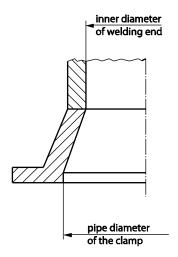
Prinziple of inner diameter for clamp and welding
